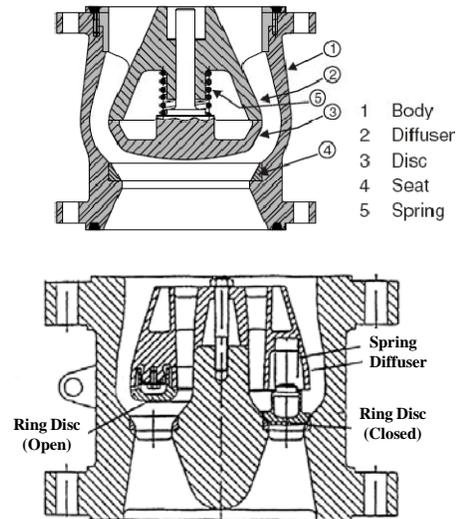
A SCHEMATIC OF A NOZZLE TYPE CHECK VALVES (TOP: FULL ROUND DISC [3], BOTTOM: RING DISC [4]).
